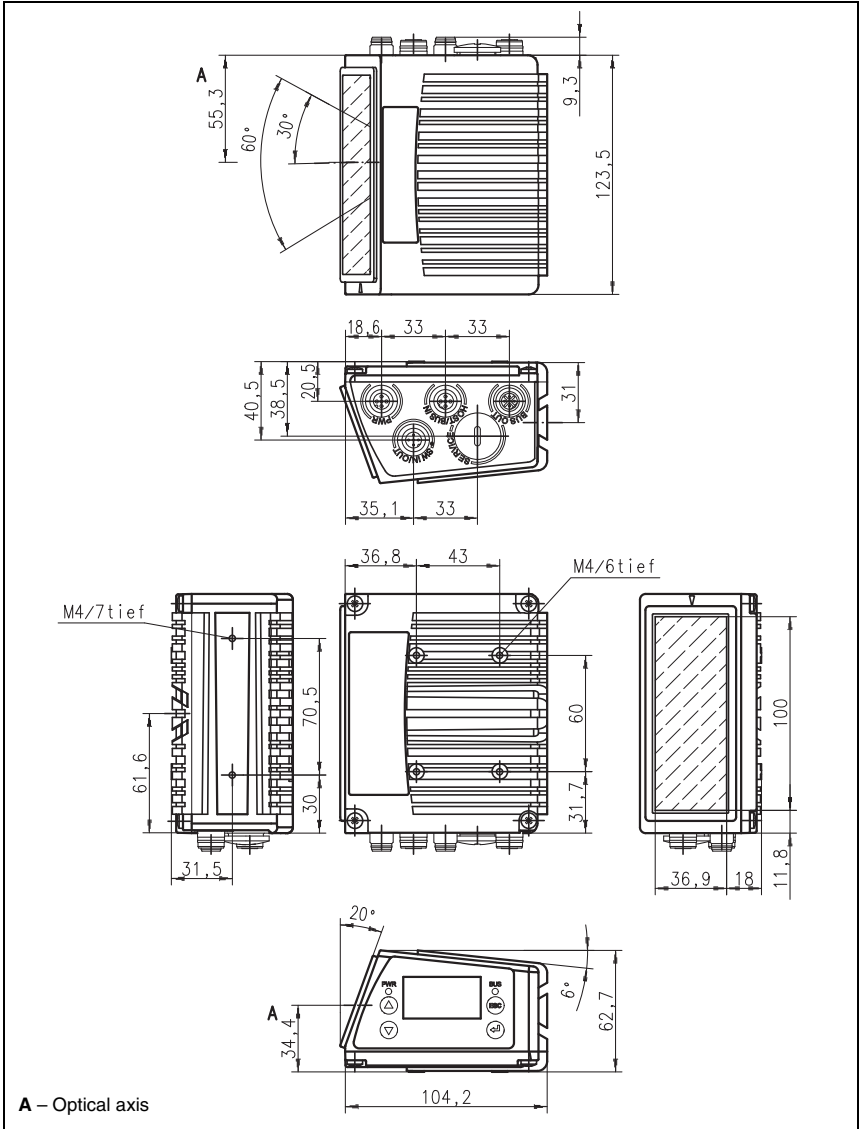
Dimensioned drawing BCL 508*i* line scanner S...102
